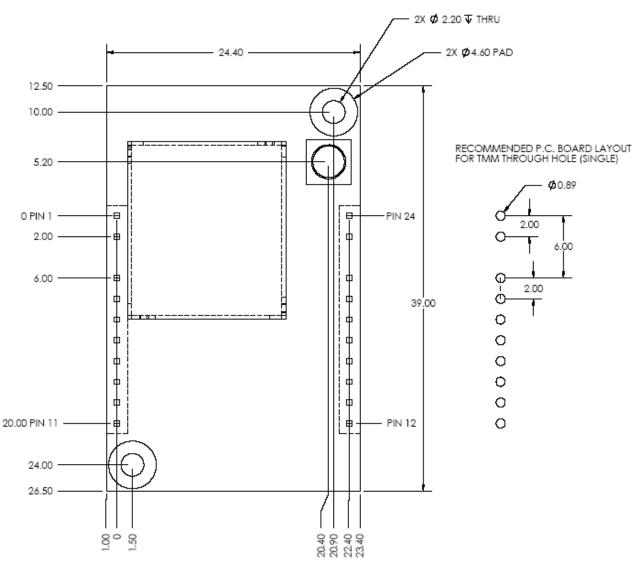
M1030-2 Mote Footprint—Mechanical drawing
